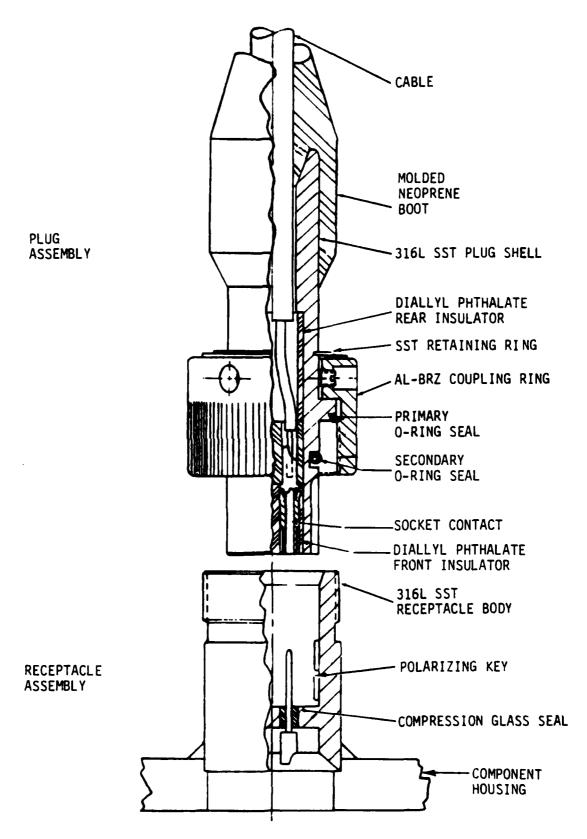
NAVSEA dwg 815-1197170 connector assembly.
